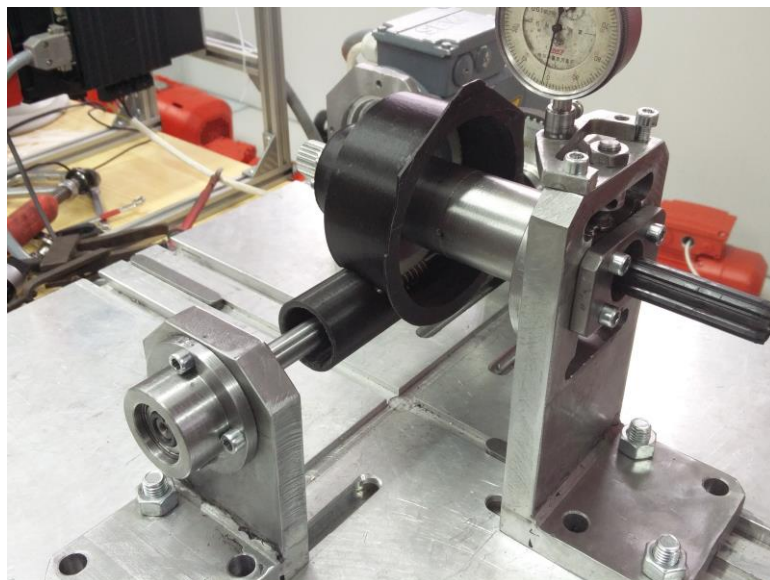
Test/production bench of power steering gear housing with mechanical and insulating parts mounted.
